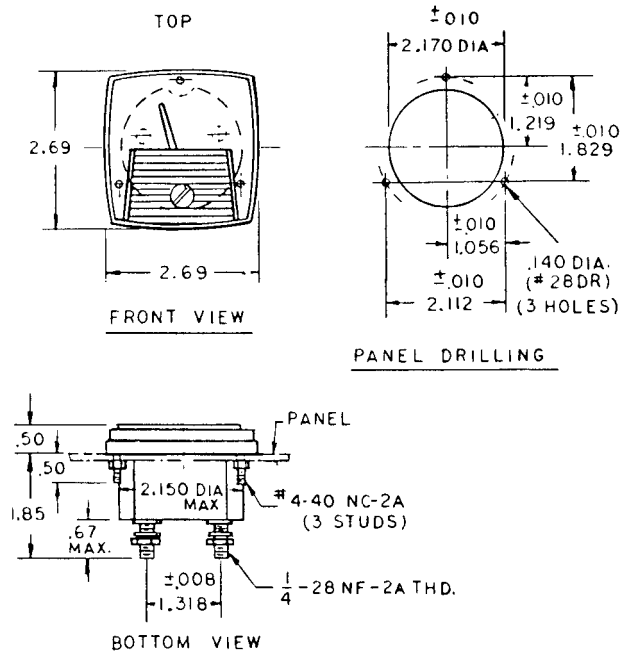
Outline and Panel-Drilling Dimensions for External AC Milliammeters
